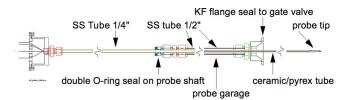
(Color online) Schematic exploded assembly view of the RSX standard probe design, showing Swagelok seals,  $\frac{1}{4}$  in. SS probe shaft, and the  $\frac{1}{2}$  in. SS tube probe garage assembly which allows retraction to the air side of the gate valve and enable probe changeout while maintaining vacuum integrity.
